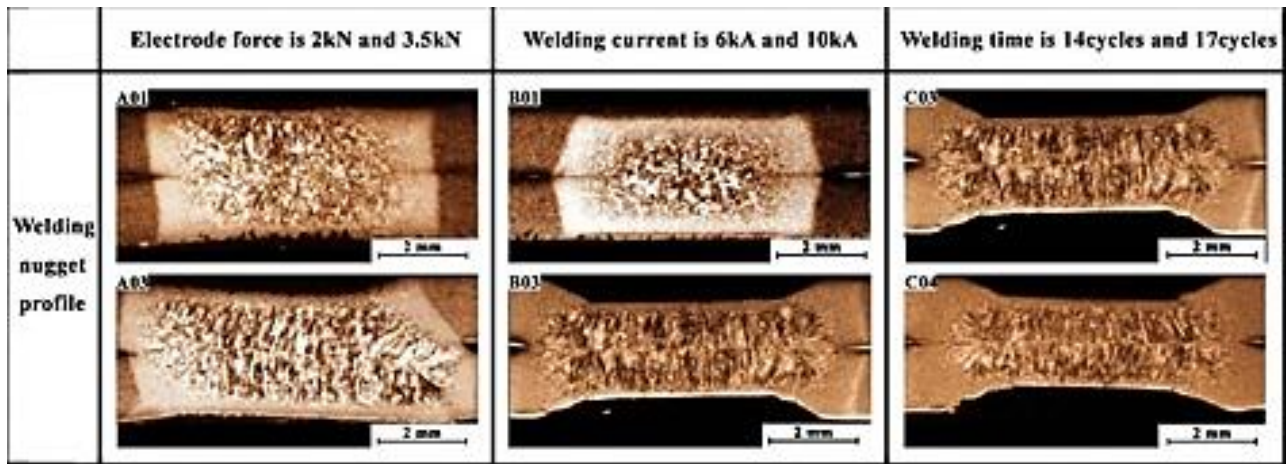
Welding nugget profiles under different welding parameters DP600 [22].
